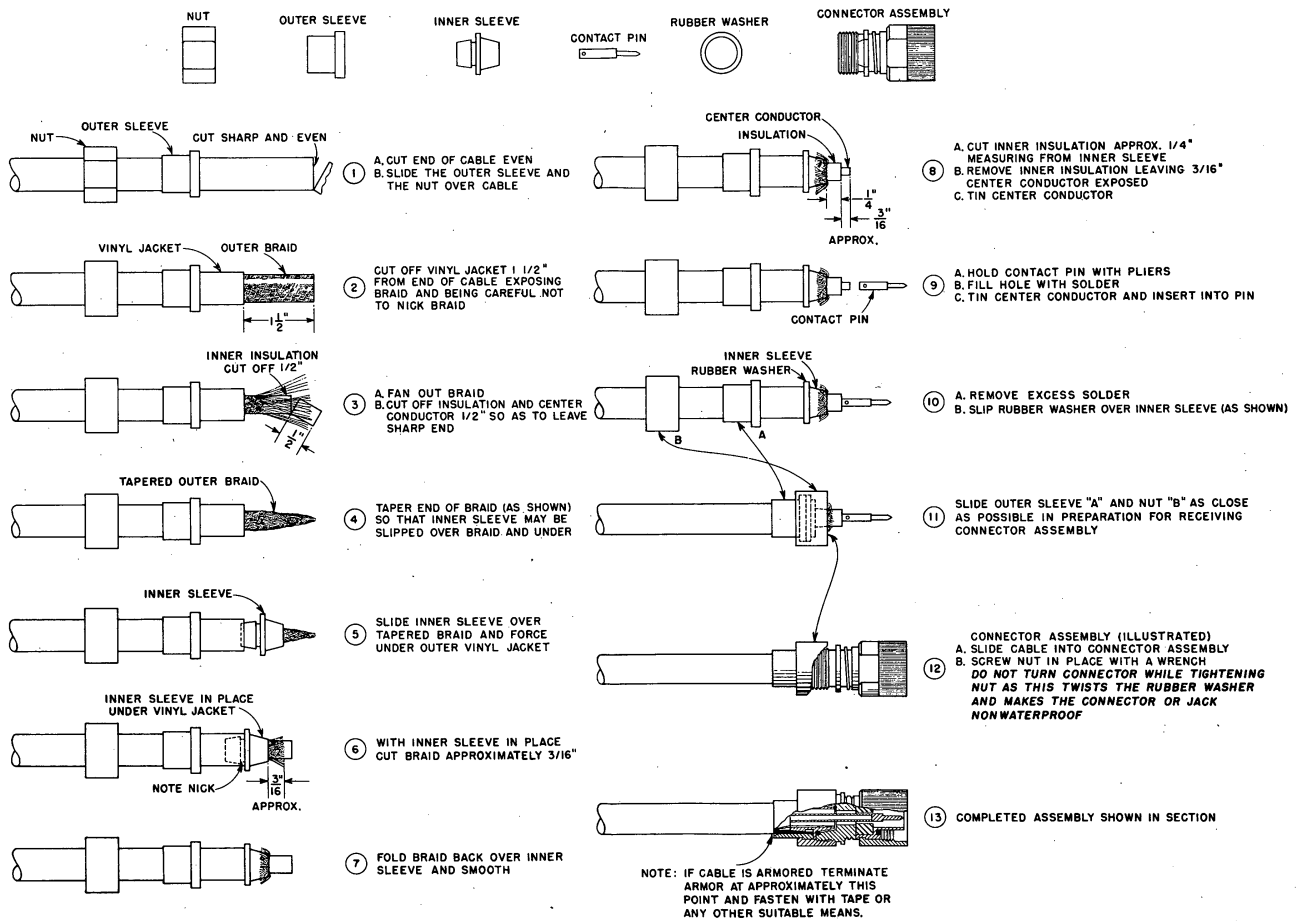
R.F. Connector, Type UG-21/U Assembly to R.F. Cable, Type RG-10/U or RG-12/U
